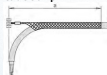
Dimensional drawing of a commercially available spring drum. /
